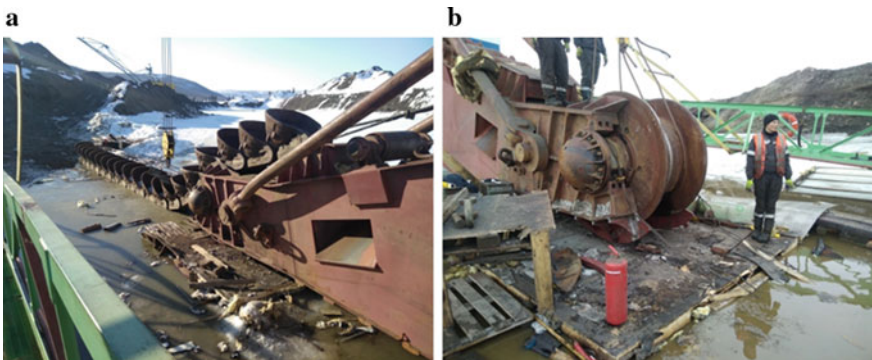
a Scooping chain during mounting on the frame dredge 250 l and b lower scooping drum during mounting on the frame of the dredge 250 l
